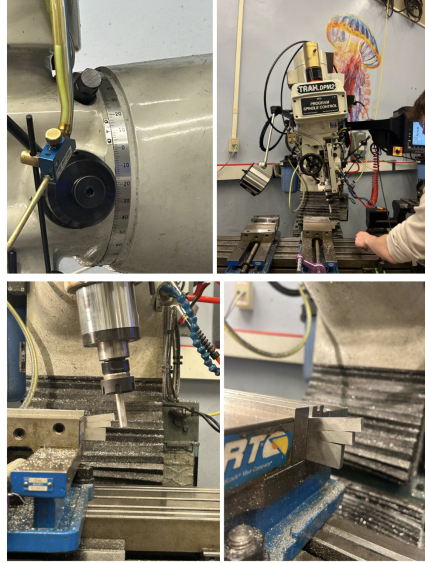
Mill tram indicator and angle block setup used to set the mill head angle for the angled trailing edge cut.
